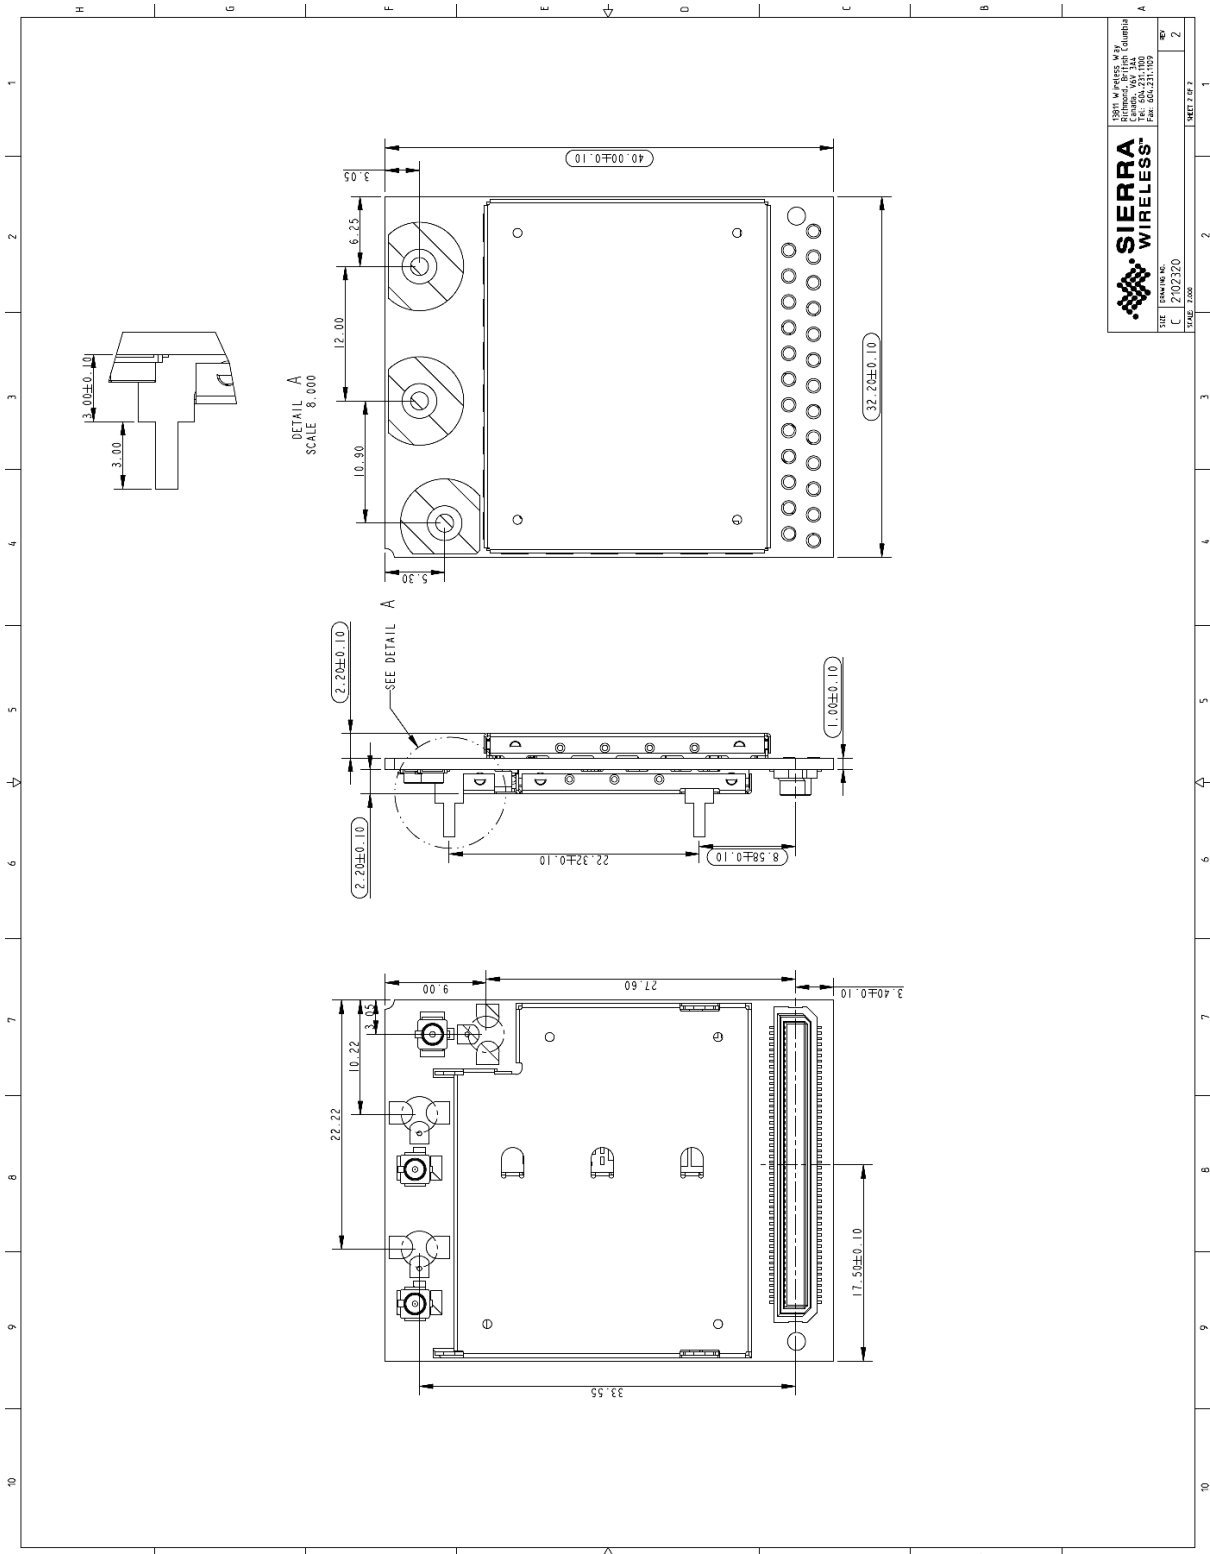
AirPrime Q2698 Circuit Card Assembly (figure 2 of 2)
